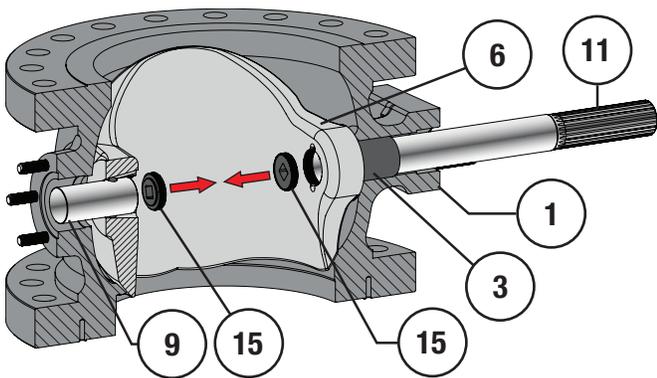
3 to 12" NPS Follower Shaft Removal
